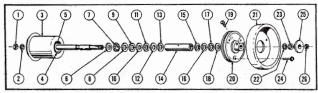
SHIM PROCEDURE FOR ASSEMBLING TURNTABLE SHAFT
